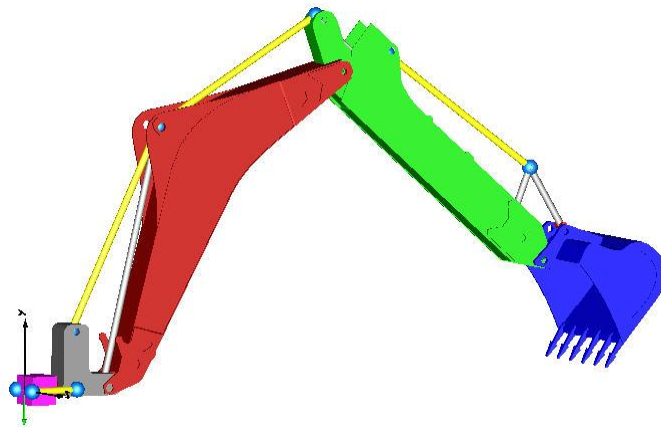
Assembled Backhoe Manipulator using CAD Parts
